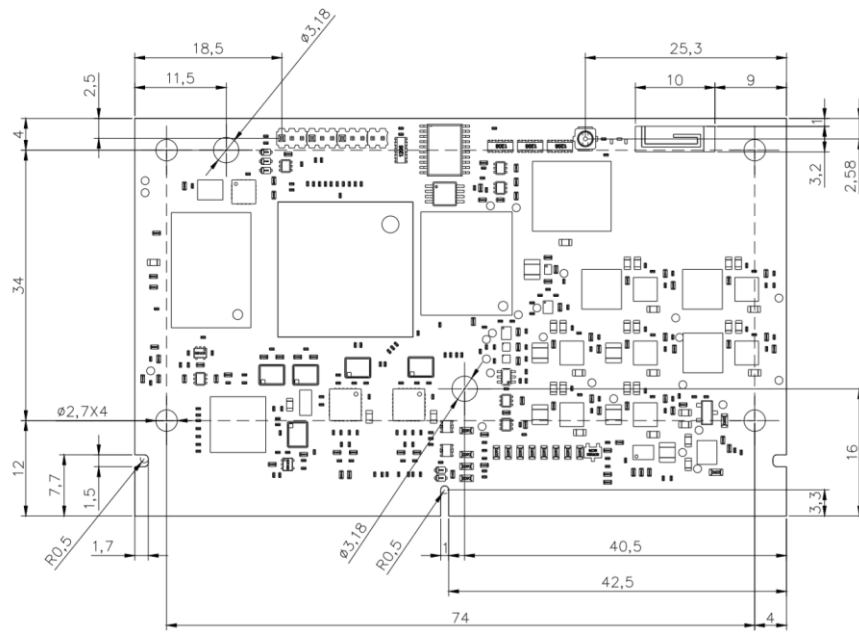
SMARC iMX8M Side view detailed mechanical dimension
